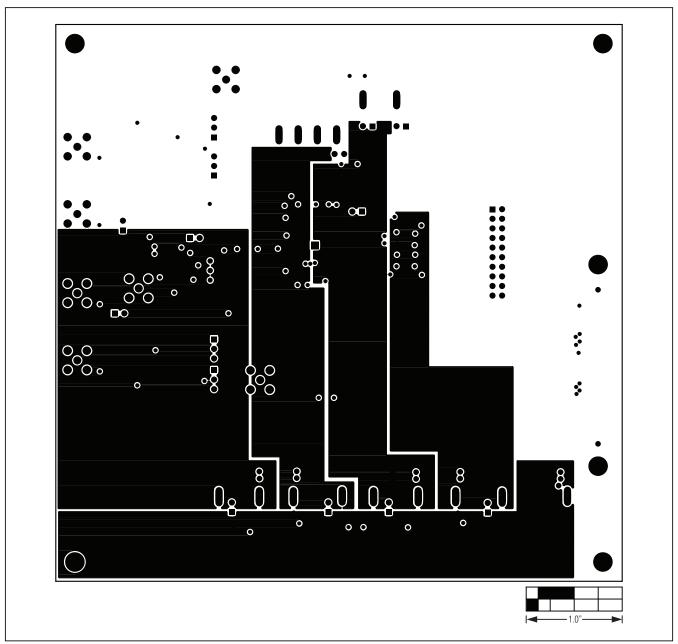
MAX19192 EV Kit PCB Layout—Power Planes
